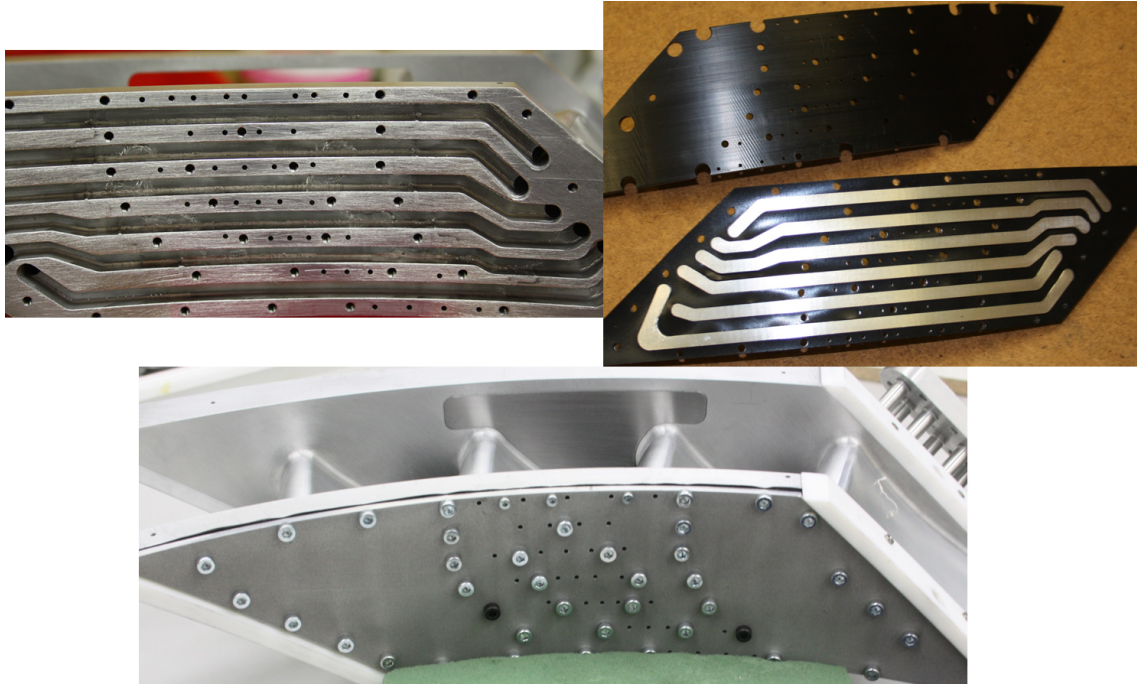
Top left - Hub channels after assembly, laser welding of the plugs and separations. Top right - Cover and NBR seal assembled. The top black part is the POM insulation cover. Bottom - Hub platform closed with the different covers
